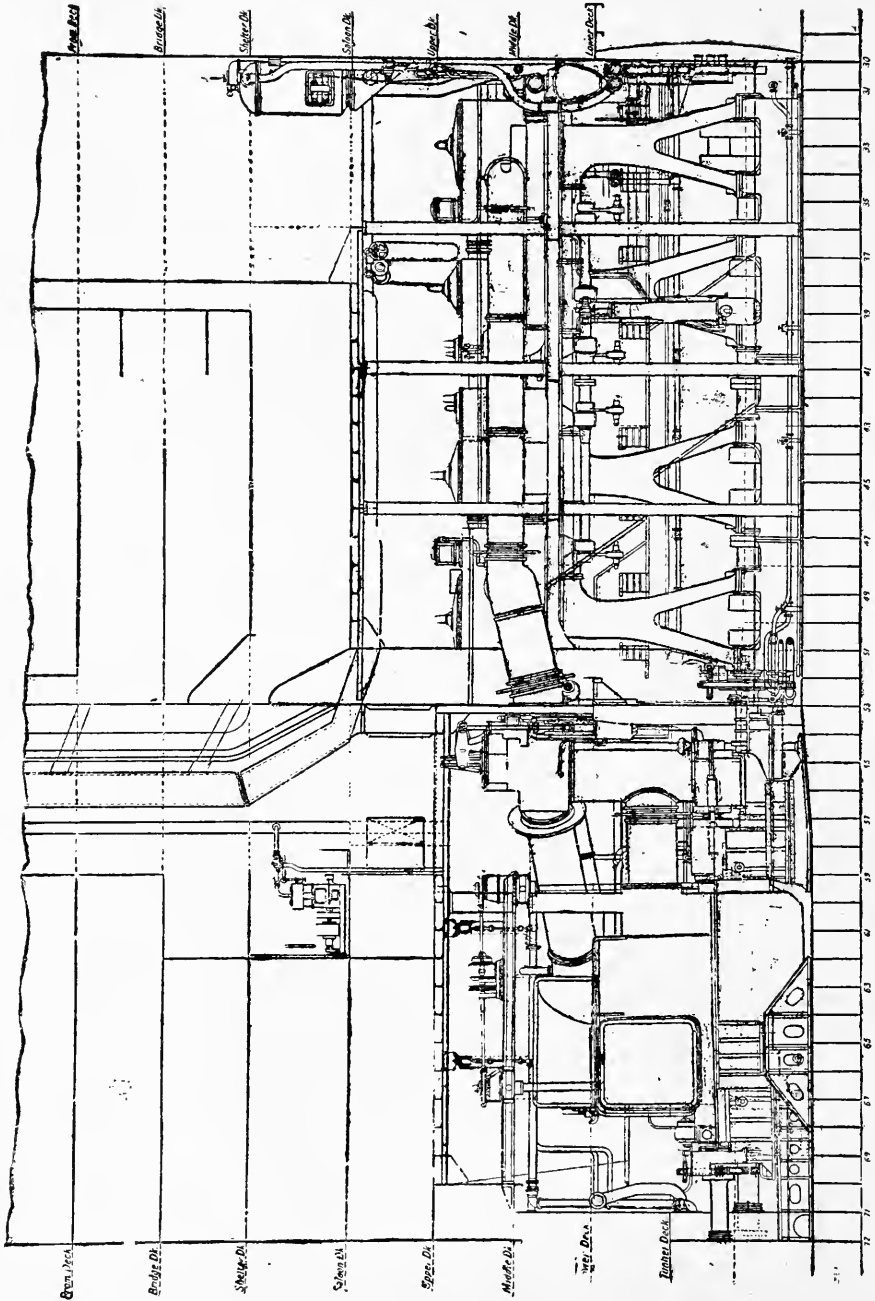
Longitudinal Section through Engine-Room of R.M.S. "Olympic," built by Harland & Wolff, Belfast.
